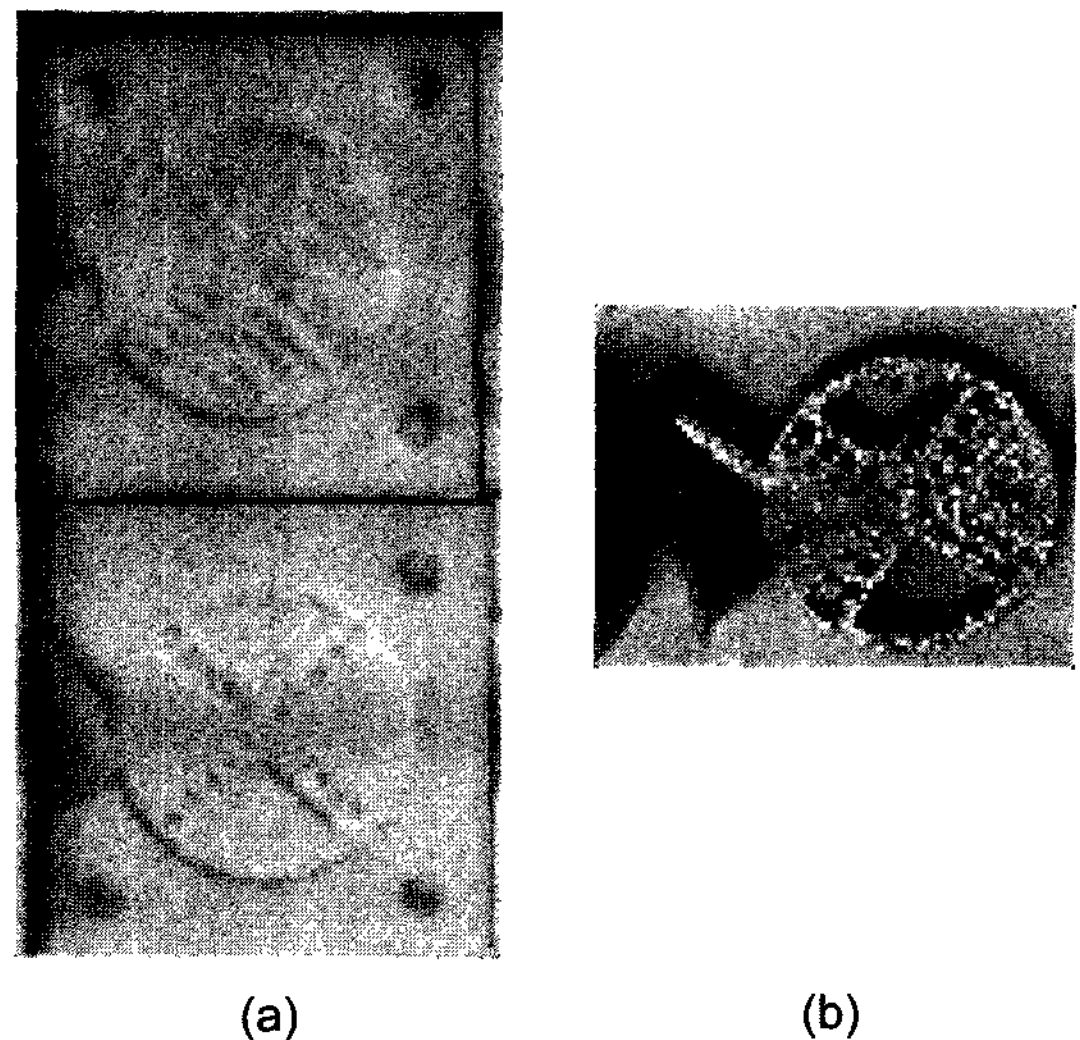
Images of (a) Duraform molds, and (b) a master pattern.
